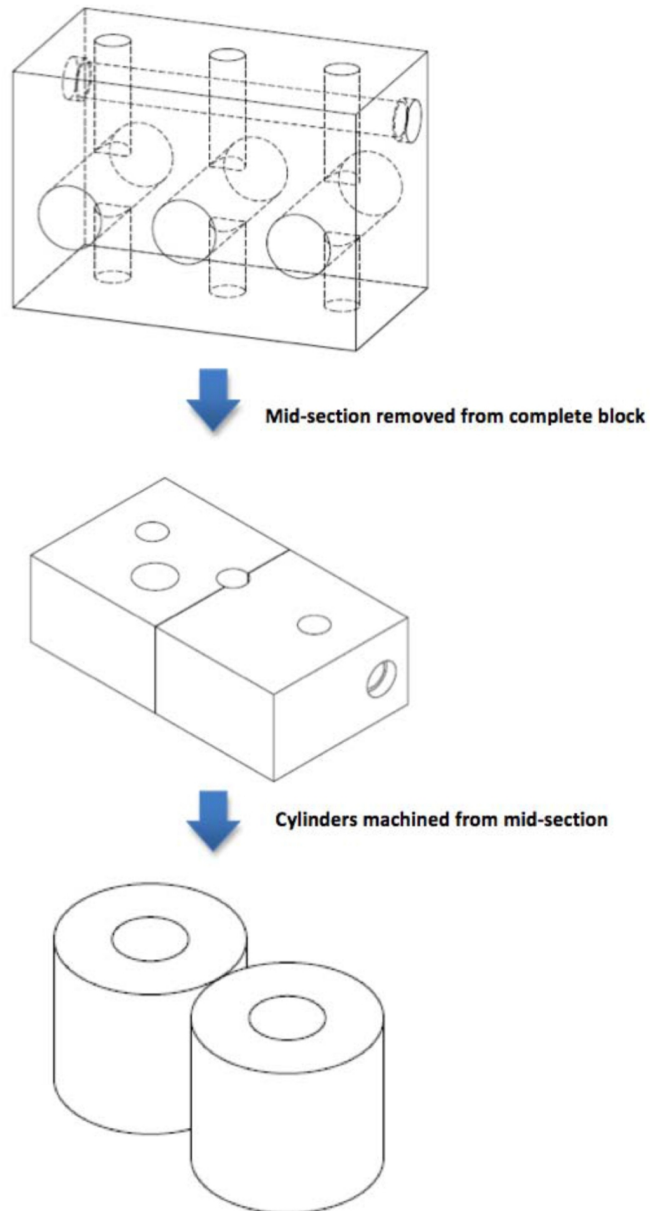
Section detail for cylindrical components - Photo courtesy of Weir SPM.
